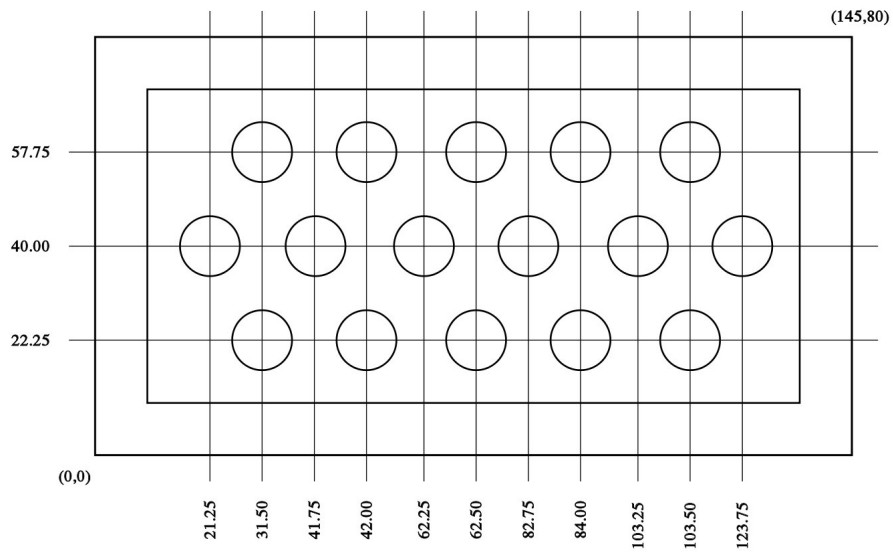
Schematic of smaller top plate with signal socket holes drilled
